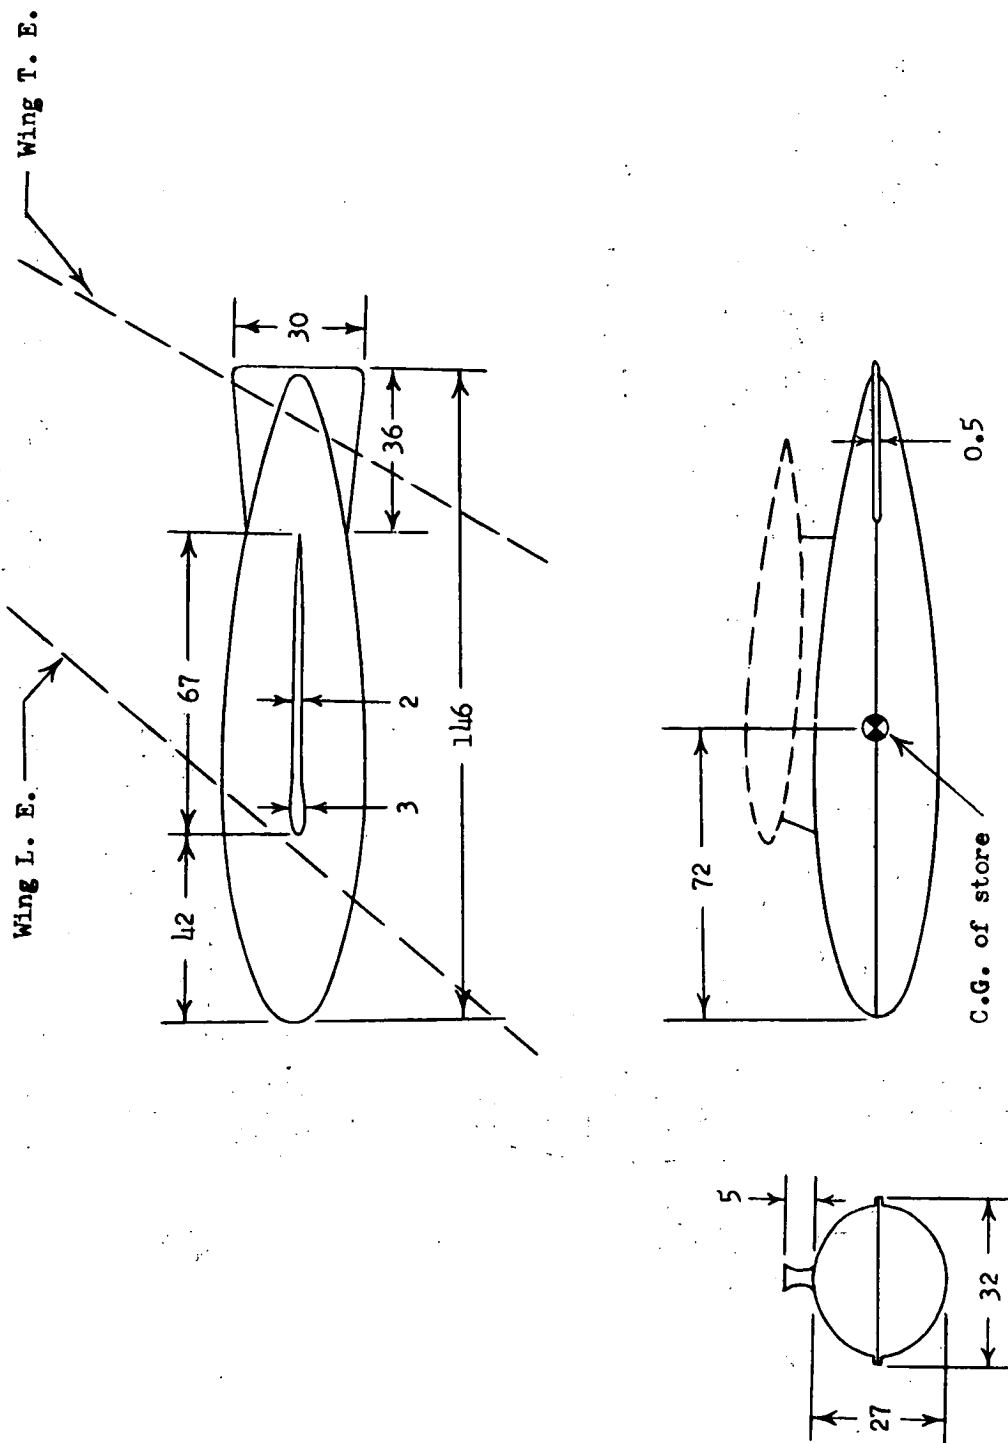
Dimensioned drawing of external store. All dimensions are in inches.
